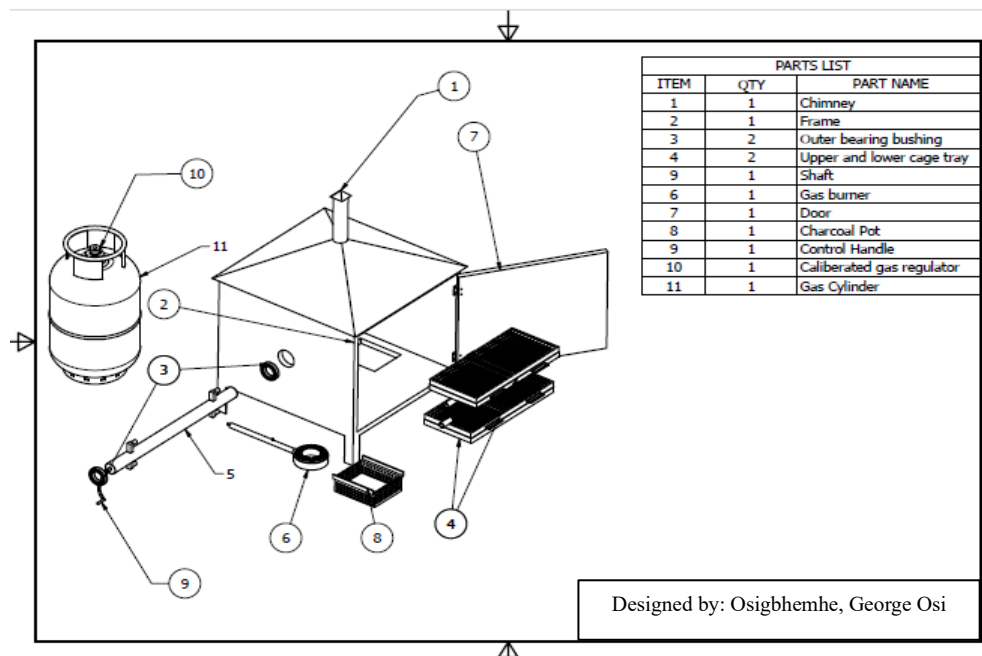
Components Exploded View of Rotary Cage-Tray System Fish Dryer
